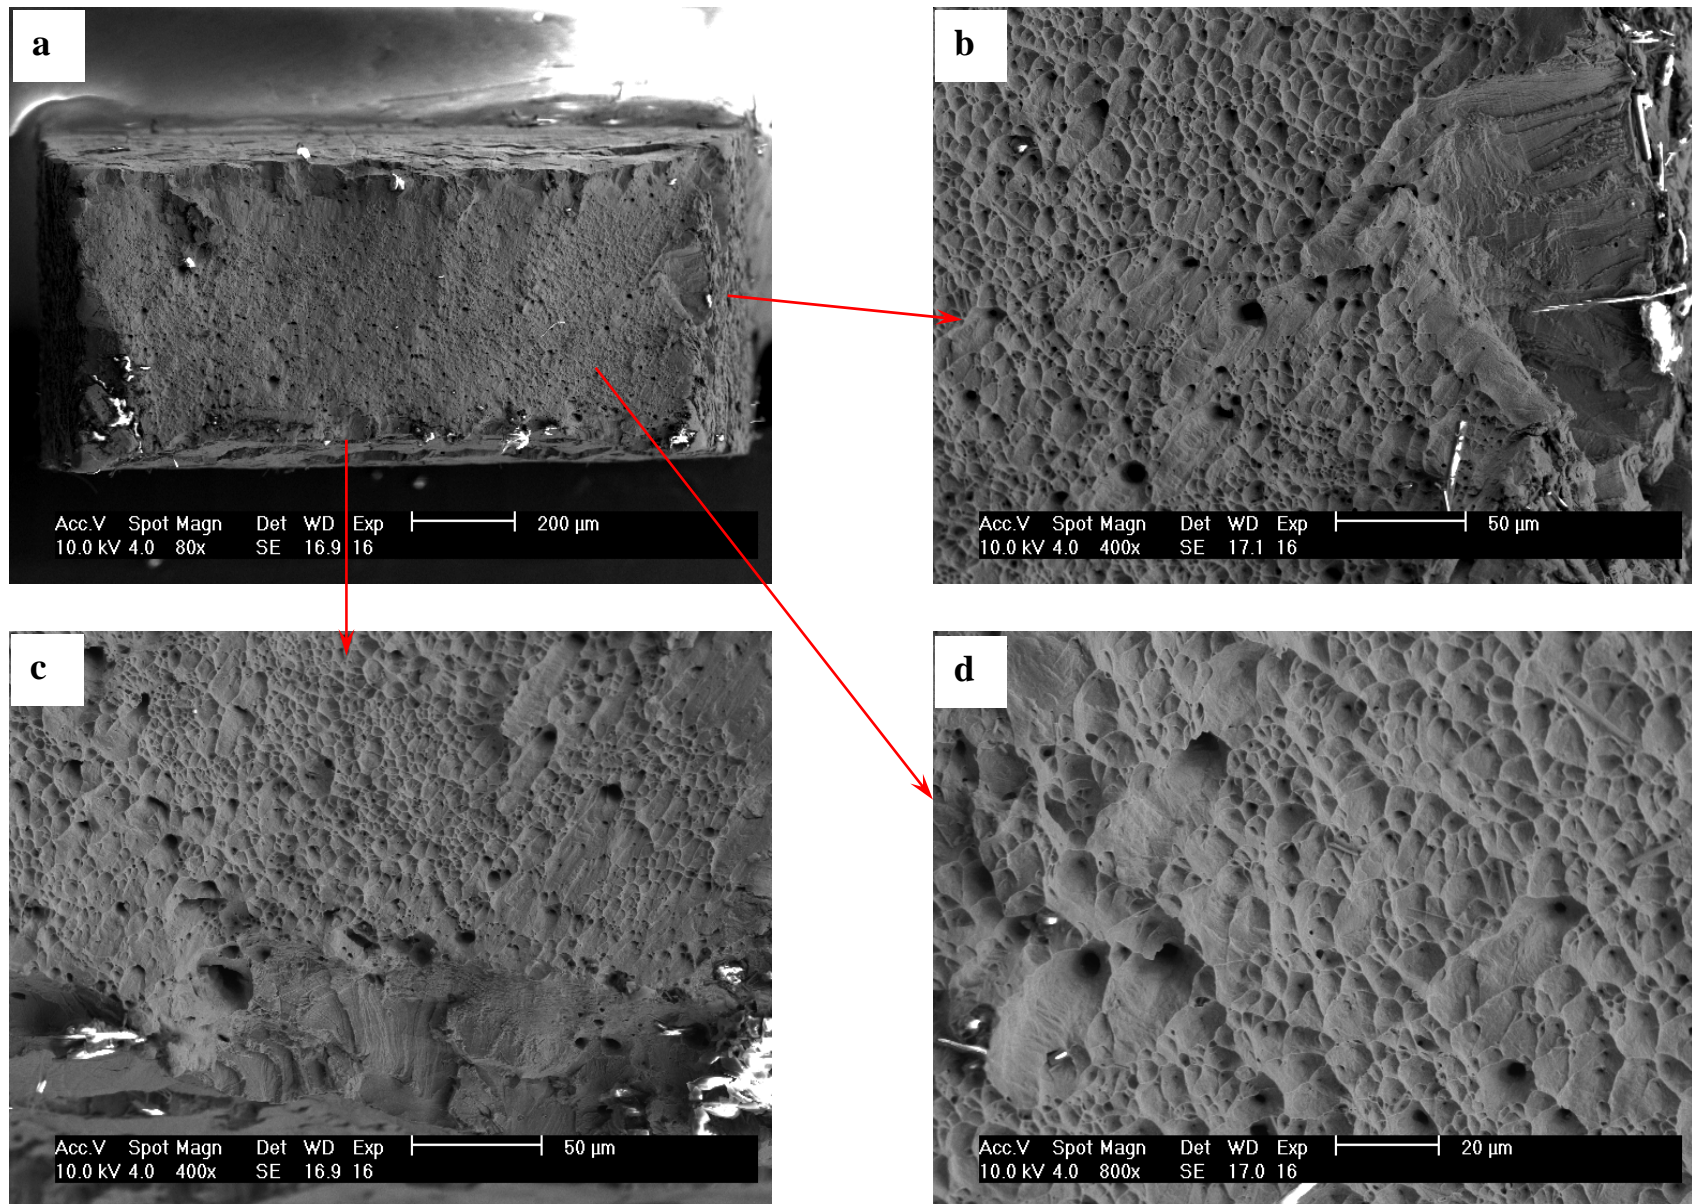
Fracture surface of GBE 316 SS irradiated to 5.5 dpa and tested in PWR water (specimen B8-1).
